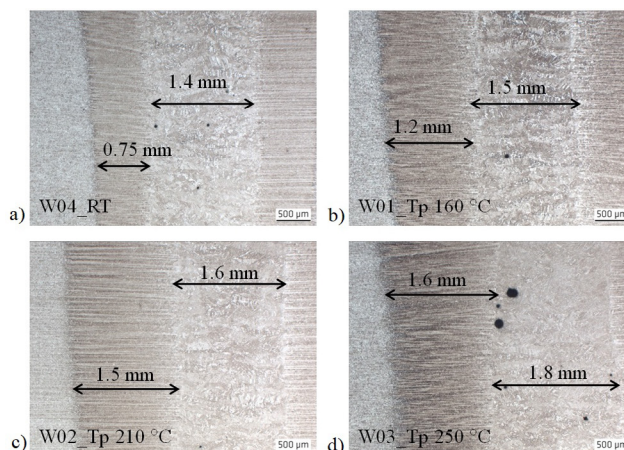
Macro sections of laser beam welds for different preheating conditions: (a) RT 28 °C; (b) T_p 160 °C; (c) T_p 210 °C and (d) T_p 250 °C.
